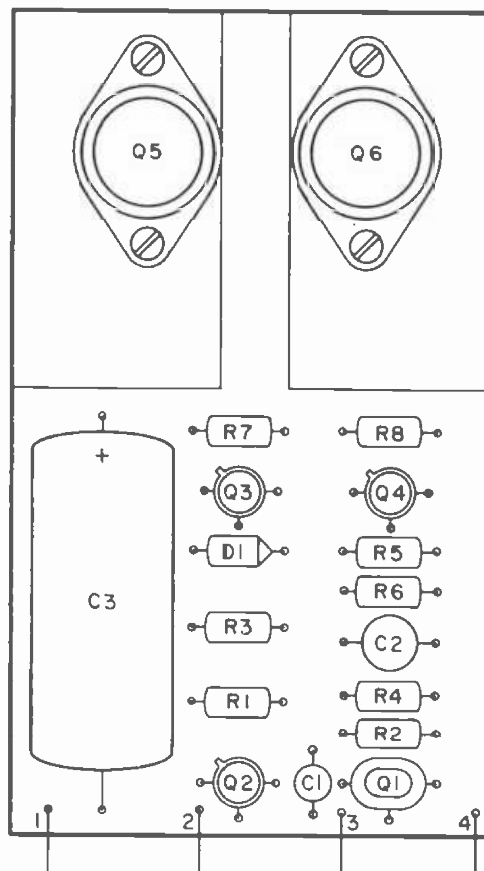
Carefully locate and solder all of the components onto the printed circuit board as shown.
